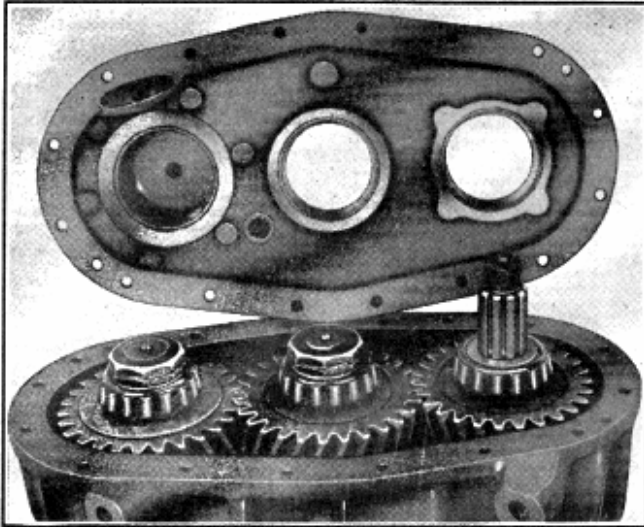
Transfer Case with Rear Cover Removed, Showing Gears and Shafts
